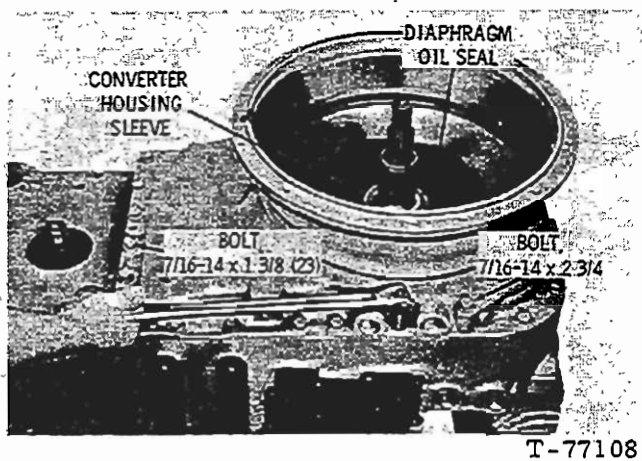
INSTALLING TORQUE CONVERTER HOUSING BOLTS
